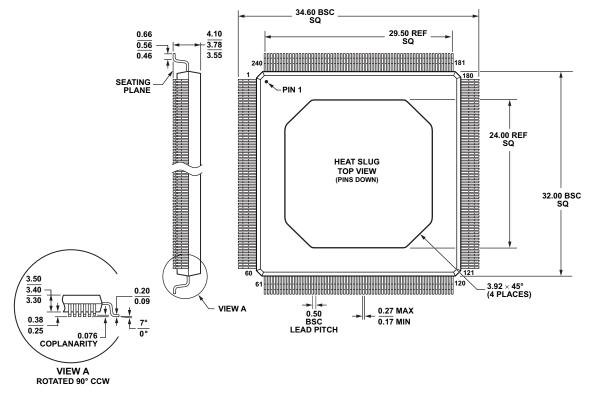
240-Lead Metric Quad Flat Package, Thermally Enhanced [MQFP/ED] (SP-240-2)
